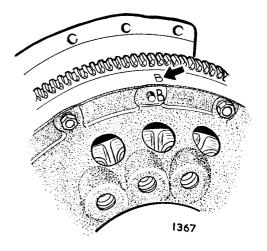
Showing the balance marks "B" on the clutch and flywheel.
